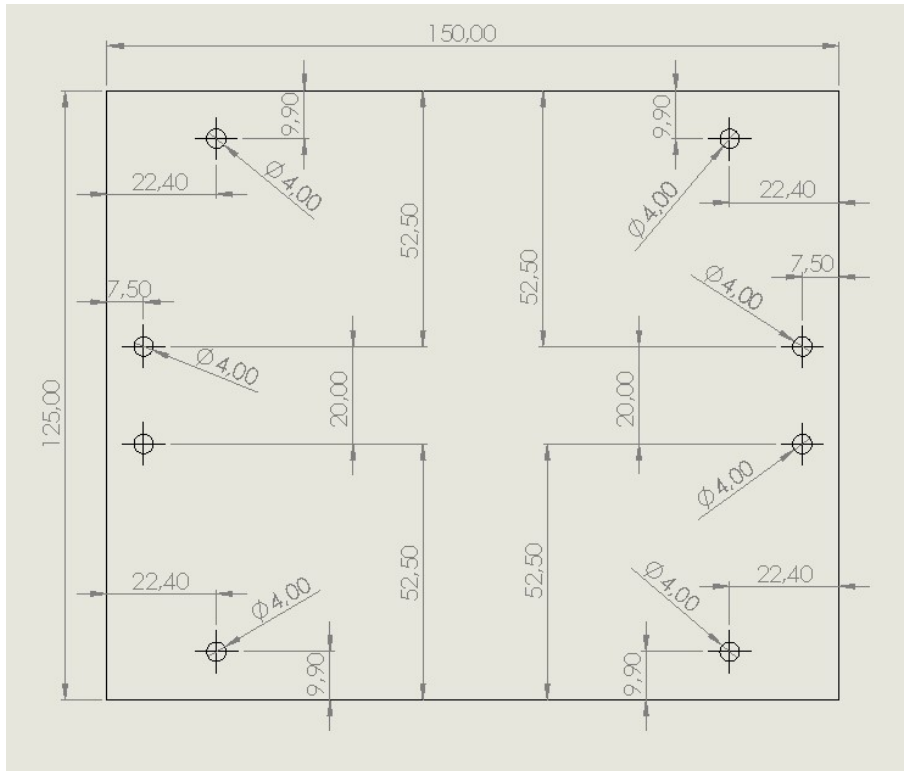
2D drawing of the aluminum support plates for the Cooling Fan.
